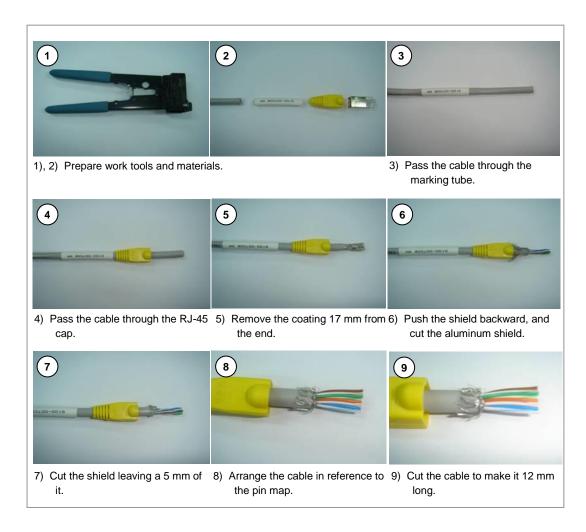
Assembling the RJ-45 Connector (Shield Type) (1)
